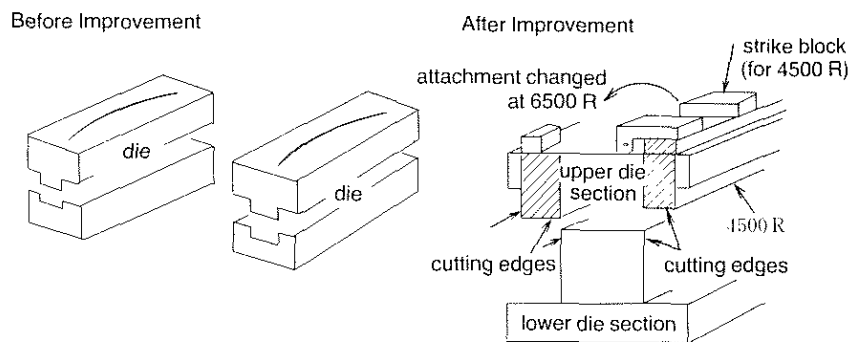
Improved Separation of a Hat-Shaped Cutting Die
